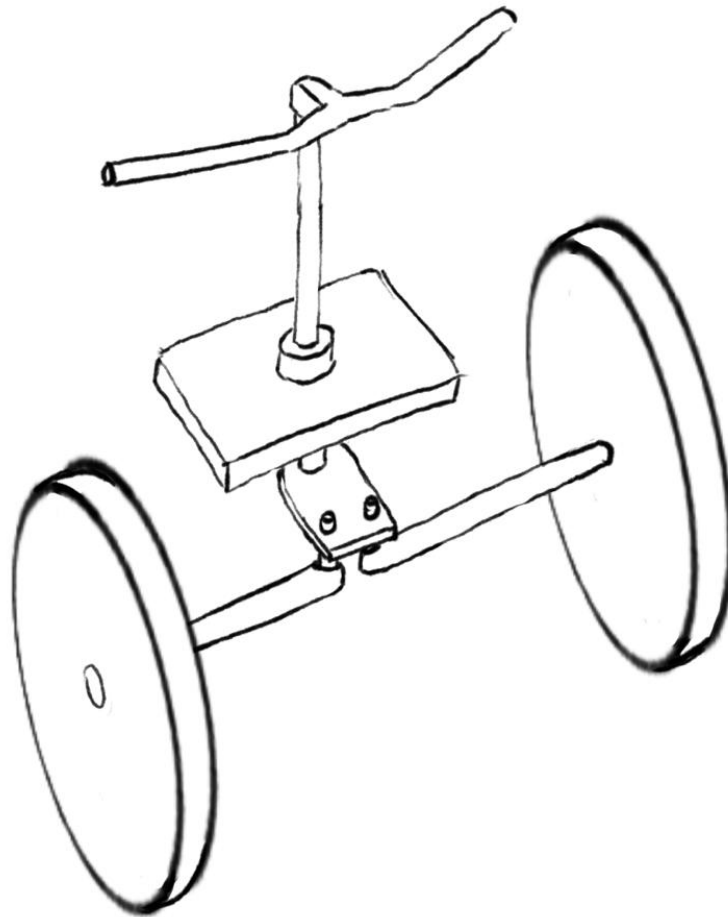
Sketch of steering system Concept 2: Handlebar with steering column (Source: Author).
